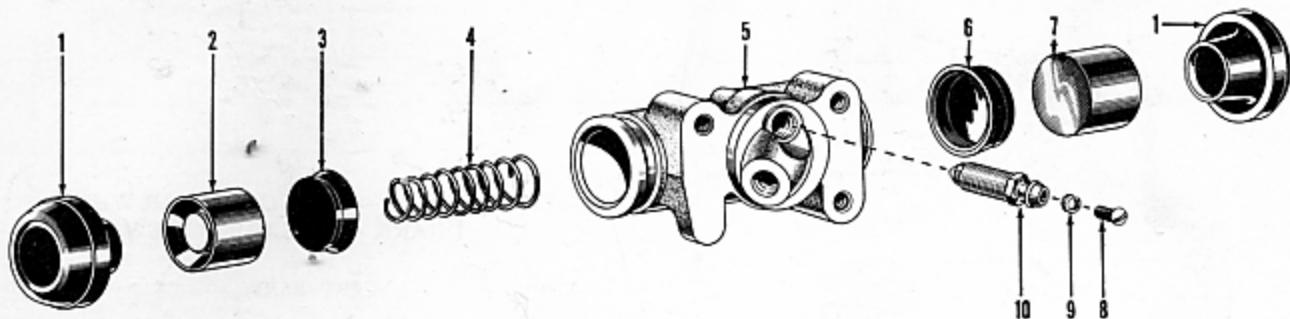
TYPICAL FRONT WHEEL BRAKE CYLINDER - EXPLODED VIEW
